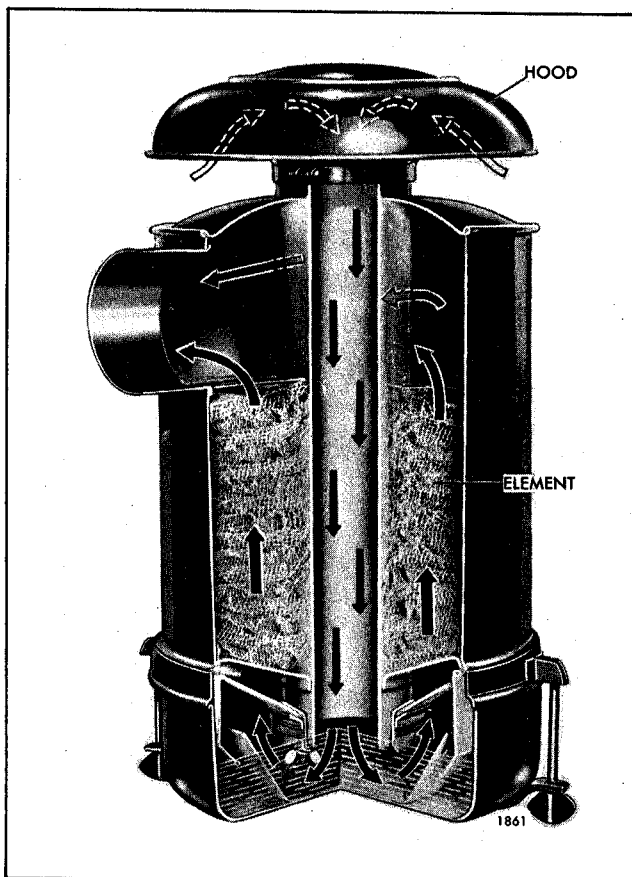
Oil Bath Air Cleaner and Silencer Assembly - Heavy-Duty
